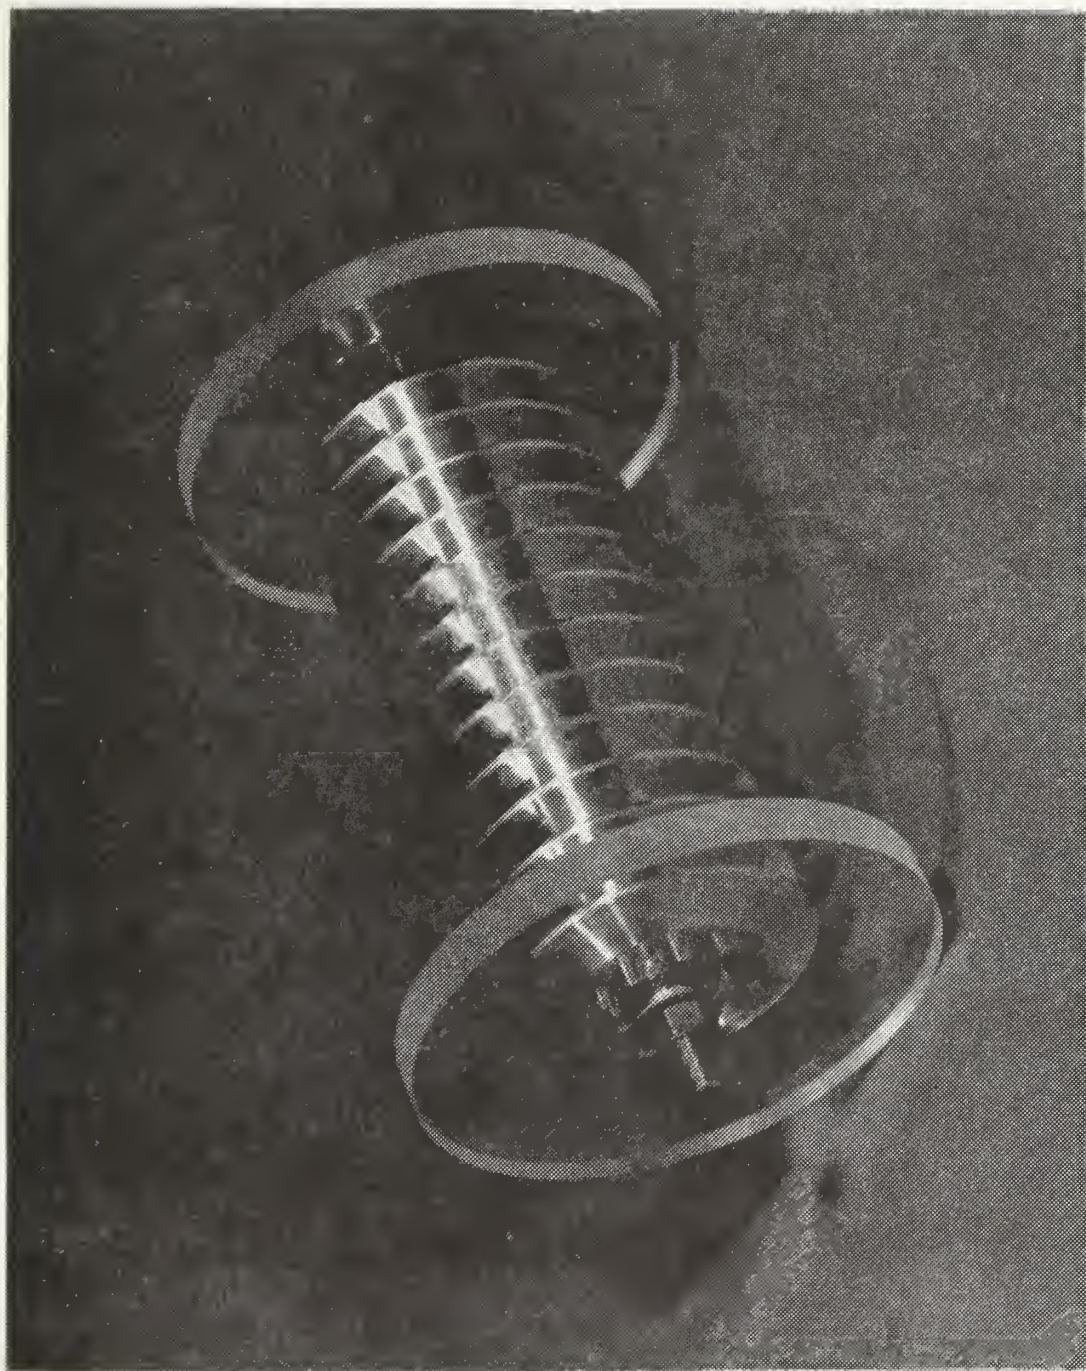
ASSEMBLED NOZZLE STACK (COURTESY NWC, CHINA LAKE)
